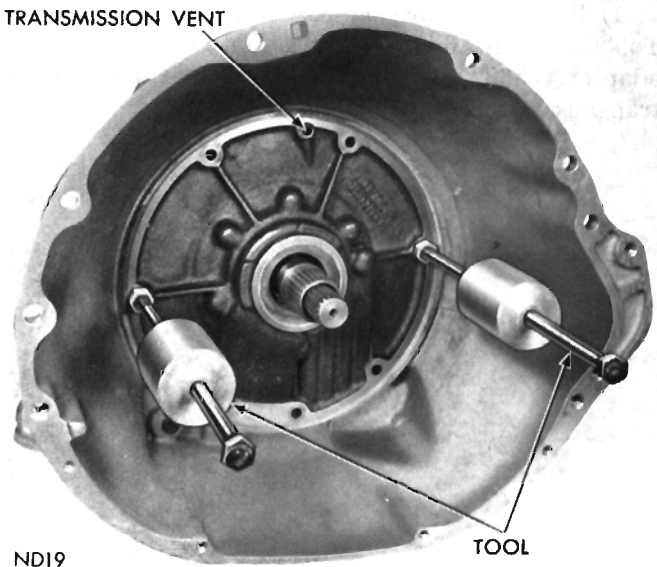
Removing Pump and Reaction Shaft Support Assembly
